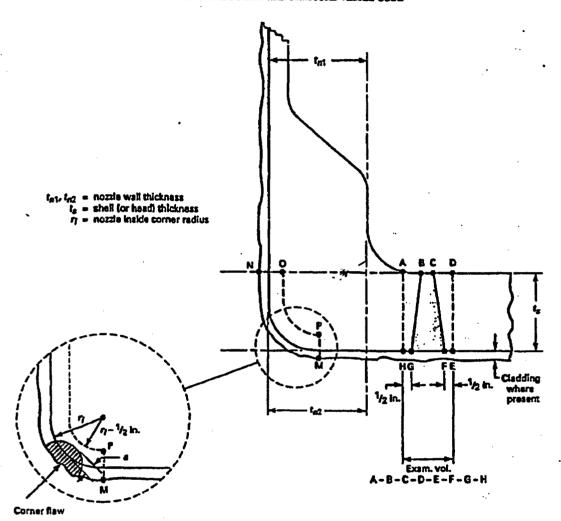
NOZZLE IN SHELL OR HEAD (Examination Zones in Barrel Type Nozzies Joined by Full Penetration Corner Welds)
